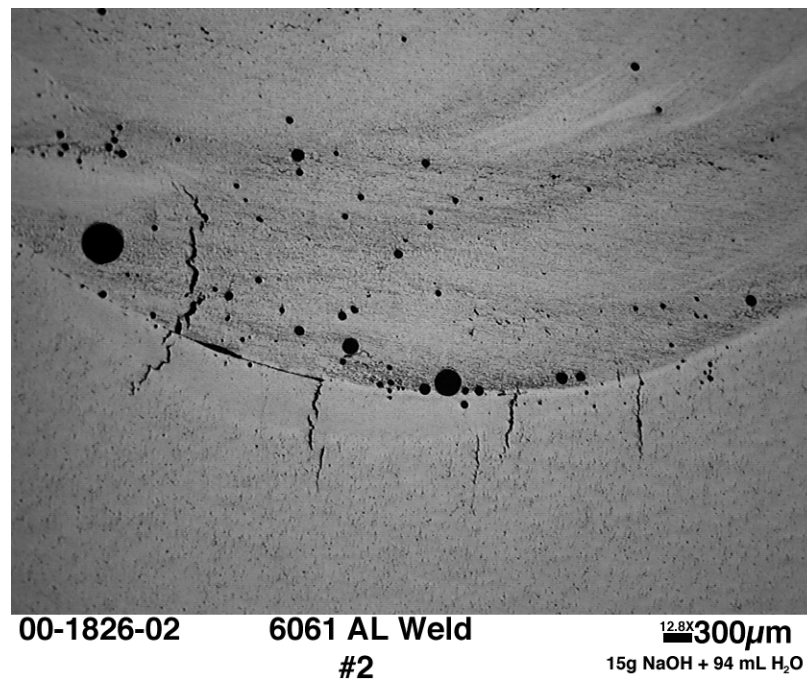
Engine head repair weld made with 5356 filler metal contained less porosity than 4043 weldment.
